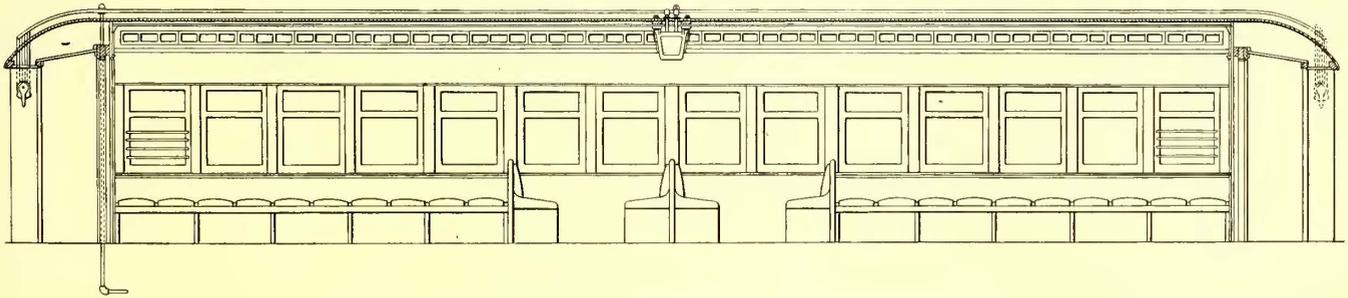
LONGITUDINAL SECTION OF CAR WITH INDICATOR
